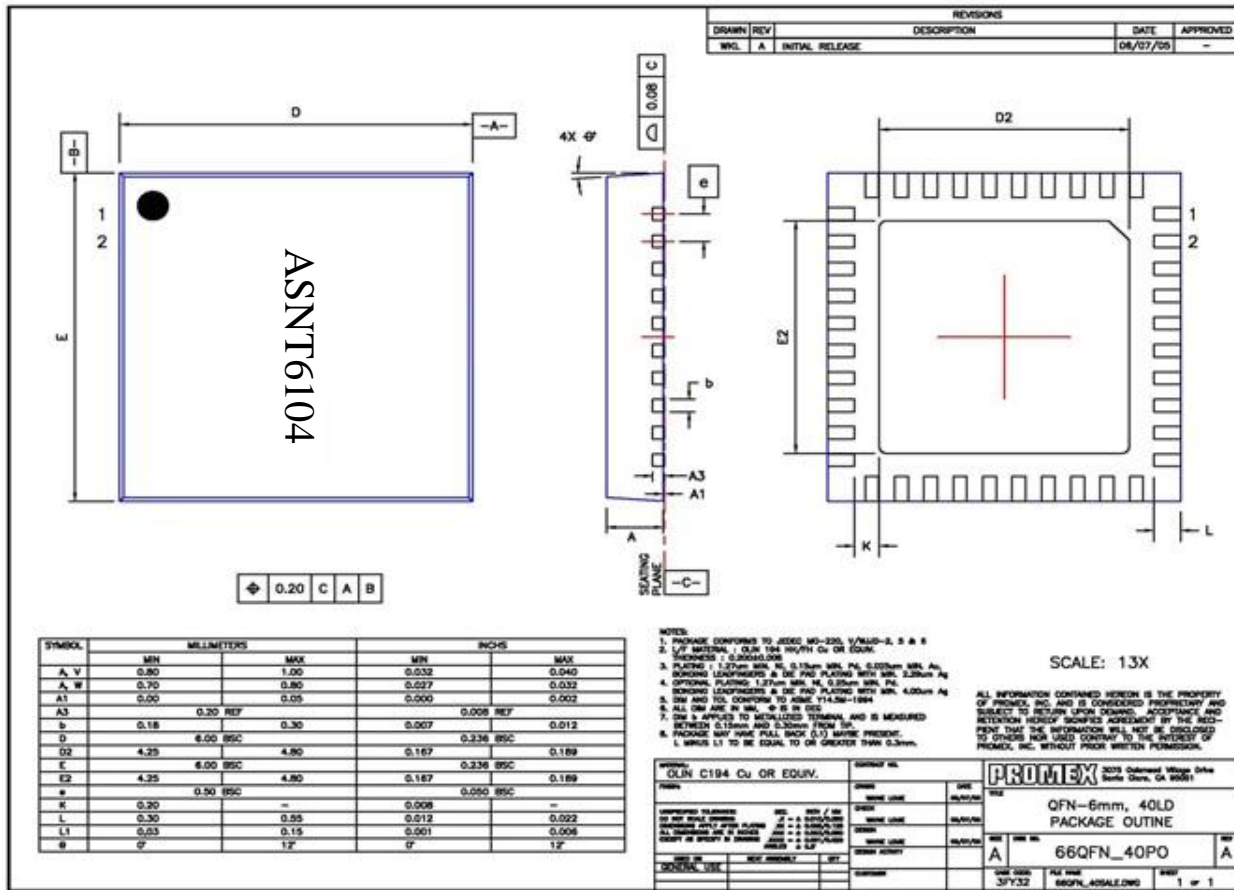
QFN 40-Pin Package Drawing (All Dimensions in mm)
